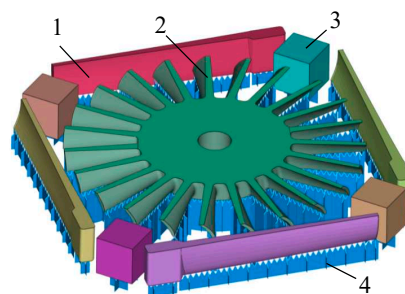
Computer model of article assembly: 1 – blade; 2 – turbine wheel; 3 – reference samples; 4 – technological supports
